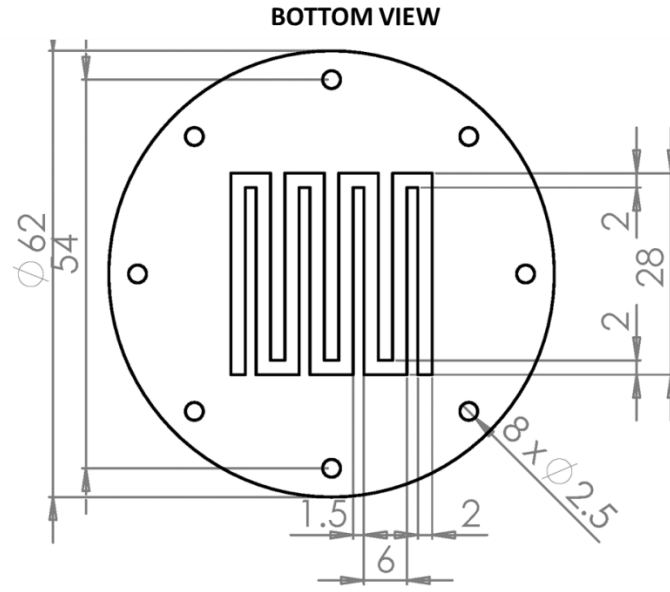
Bottom view of the copper block showing serpentine channel. All dimensions shown are in mm.
